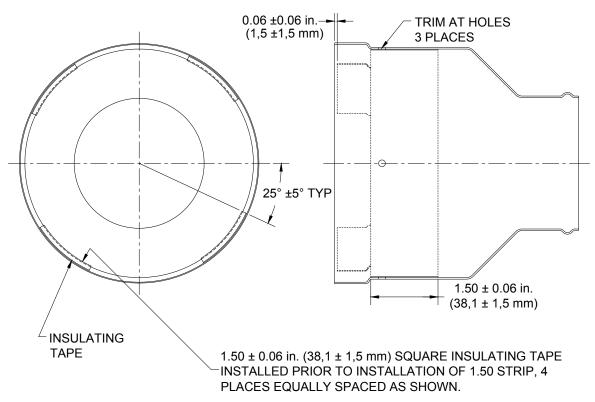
Install Air Inlet Insulating Tape (P/N: 23081-1092 and -1400)
